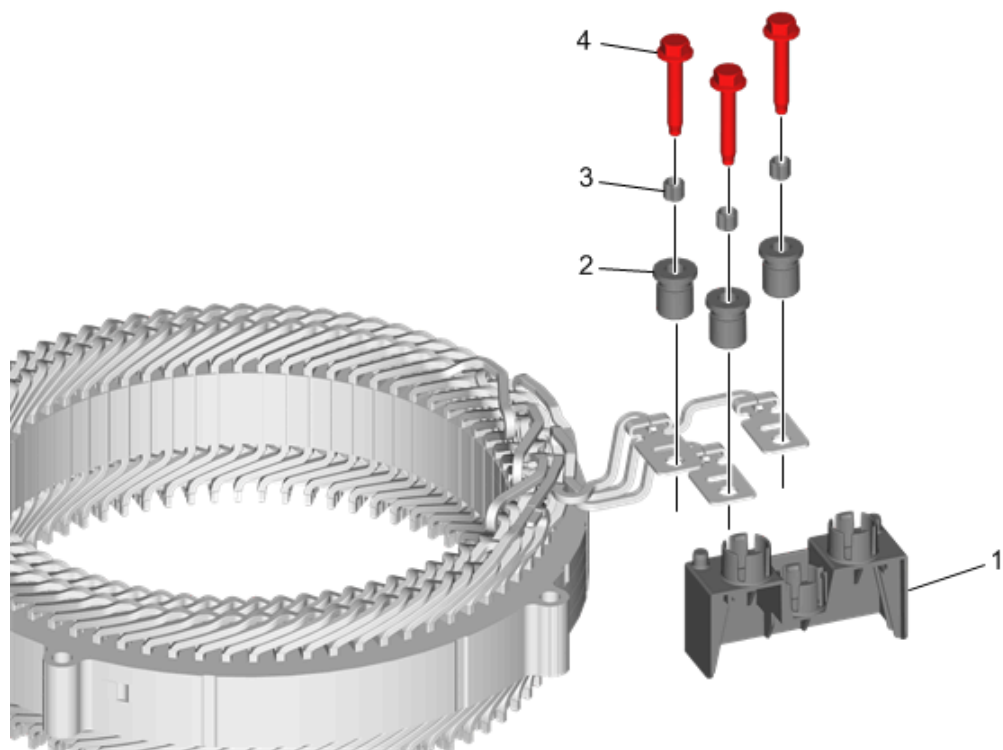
Drive Motor Power Inverter Module Cable Guide
